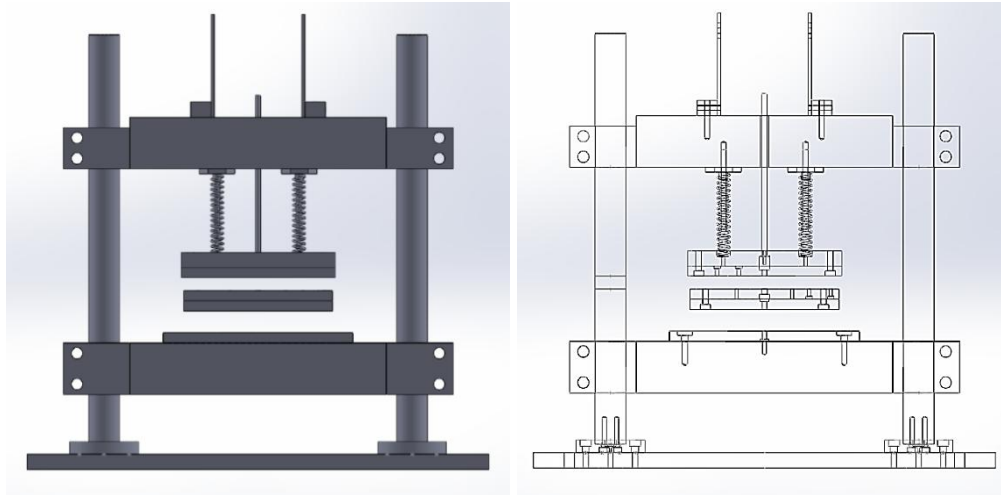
3D solid model of the setup configuration defined in Table 3.5 showing hole locations for fasteners connecting the parts
